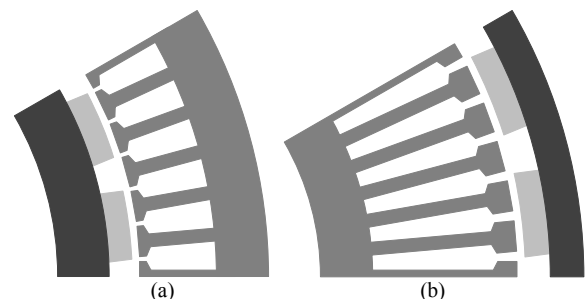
Surface-mounted PM motor's cross section (one pole pair), a) inner rotor configuration and b) outer rotor configuration.
